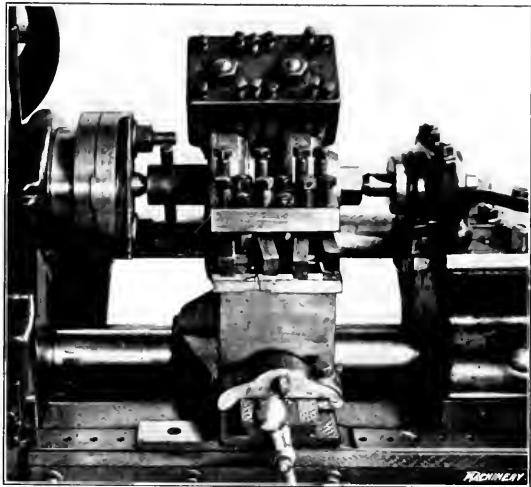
Two Pieces of Work on Arbor mounted in Fay Automatic Lathe
